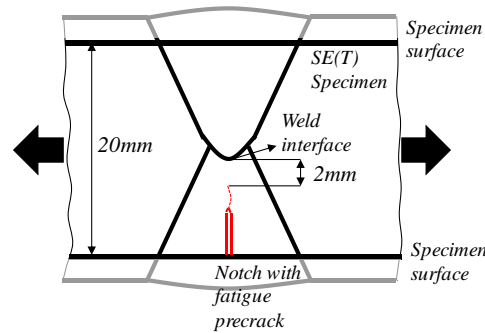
SE(T) specimen extracted from a welded plate and the notch configuration
